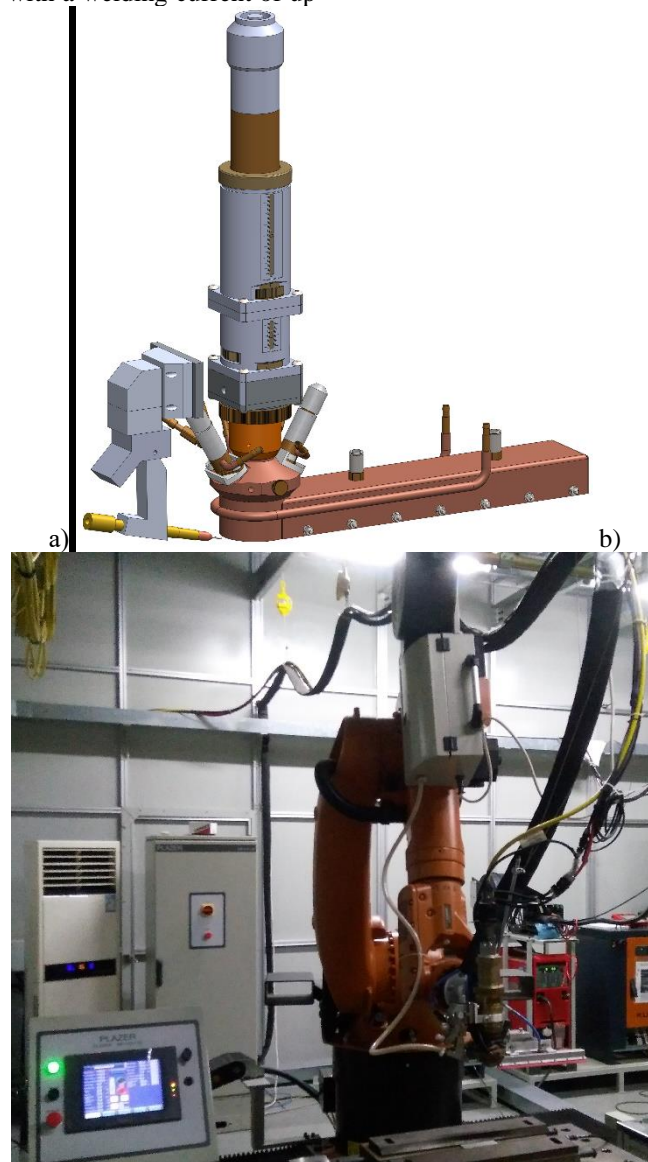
Computer model (a) of the welding head and appearance of the robotic installation (b) of PLAZER Hybrid-L5Pl laser-plasma welding.
